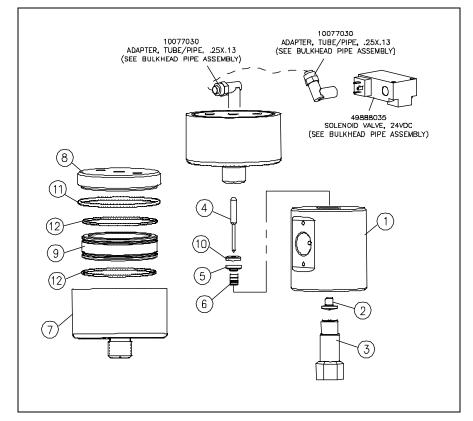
Pneumatic Valve/Actuator Assembly, Normally Open
